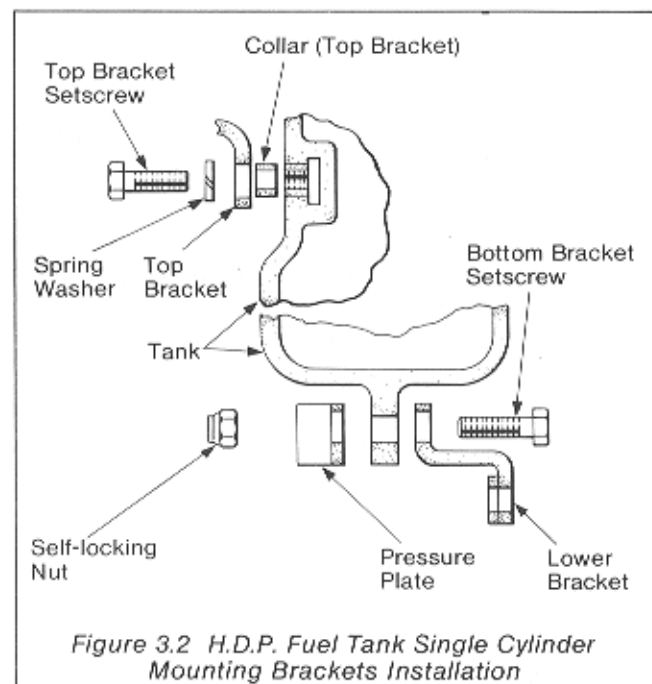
H.D.P. Fuel Tank Single Cylinder Mounting Brackets Installation
